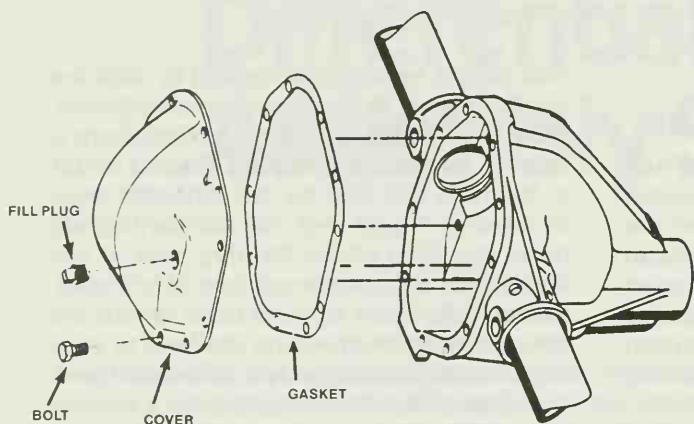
The rear cover is removed to drain the lubricant from a unitized carrier. (GMC Truck and Coach Division of General Motors Corporation)
